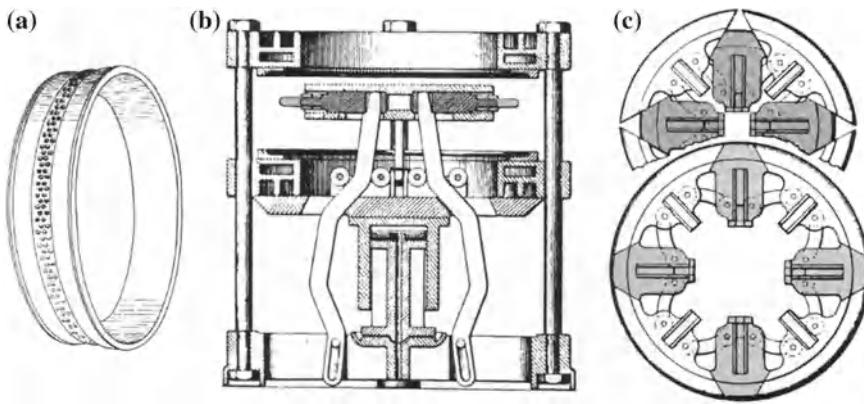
a: Die for tire reverse stamping; b and c: Expandable die for tire direct stamping (redrawn from Tompkins 1981)
